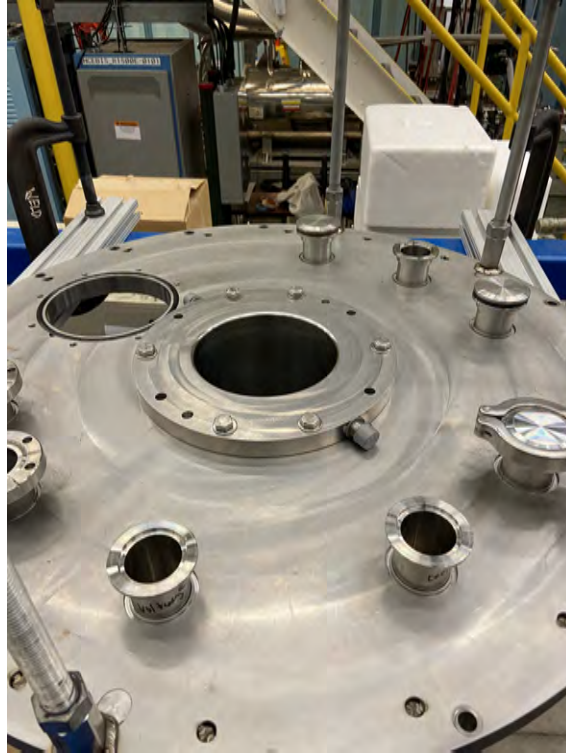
Picture of the test mating of the modular warm bore to the top flange of the testing assembly.
